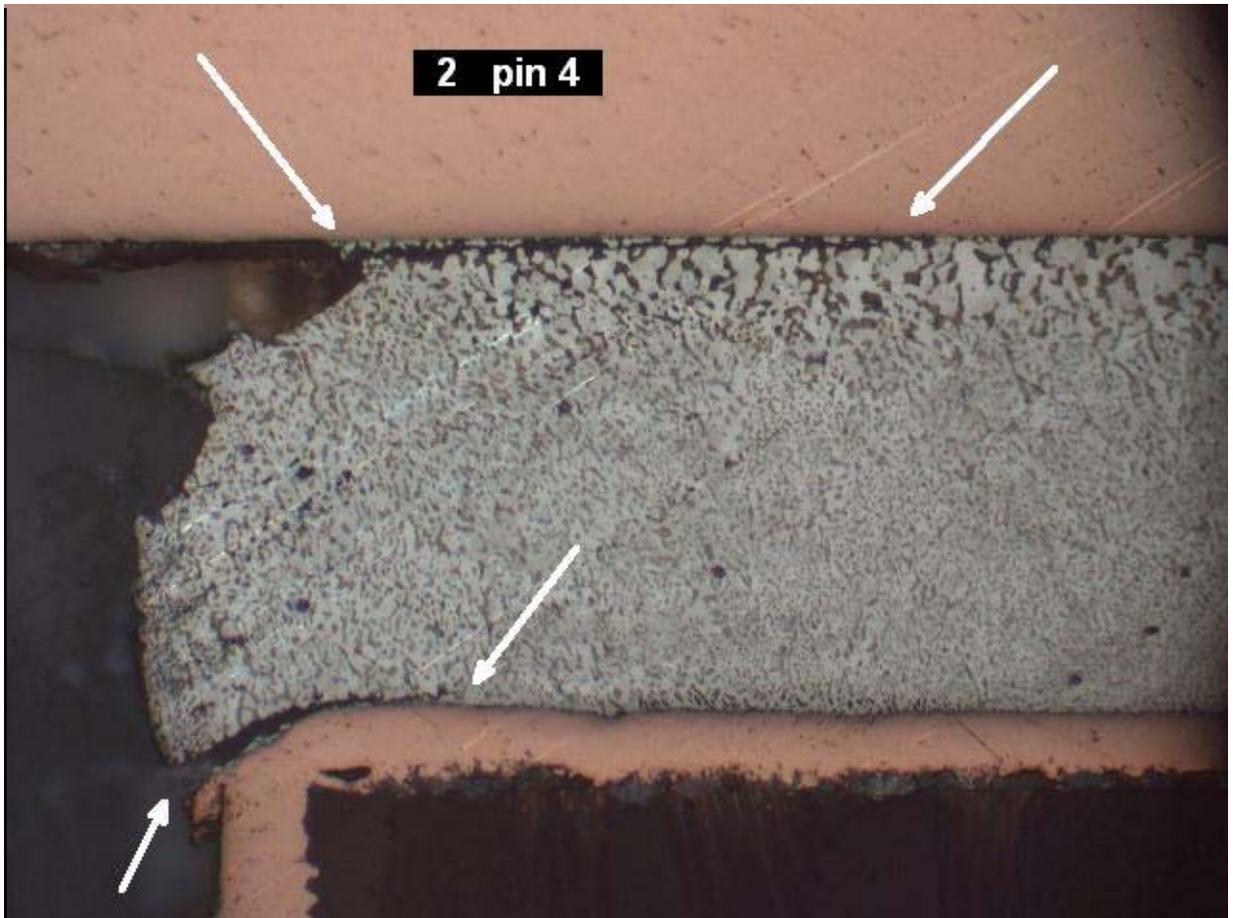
White arrows point to cracks in the solder. The top 2 arrows point to a solder crack at the interface with the pin. Note that the solder is coarse and grainy along the pin. The bottom 2 arrows point to a crack in the solder at the top corner of the PCB barrel. This is a higher magnification image of the area shown in image 3.
